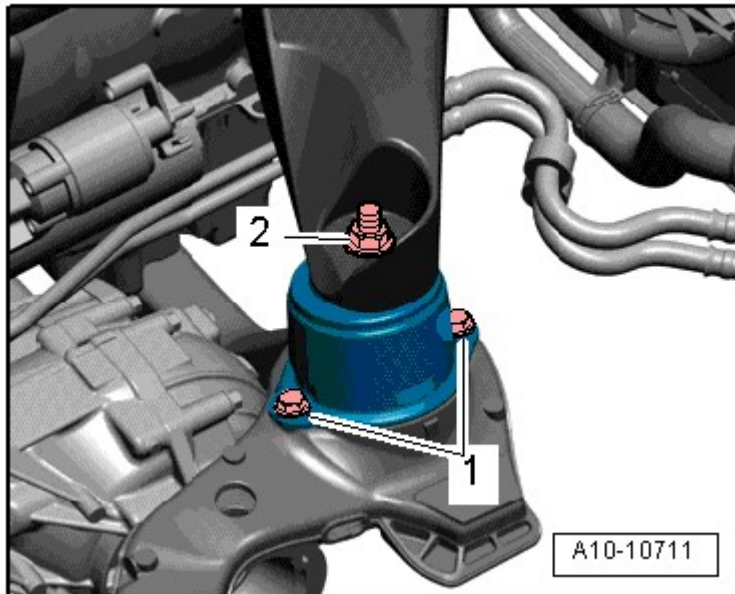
Identifying Left And Right Bolts -1- And Nuts -2-
